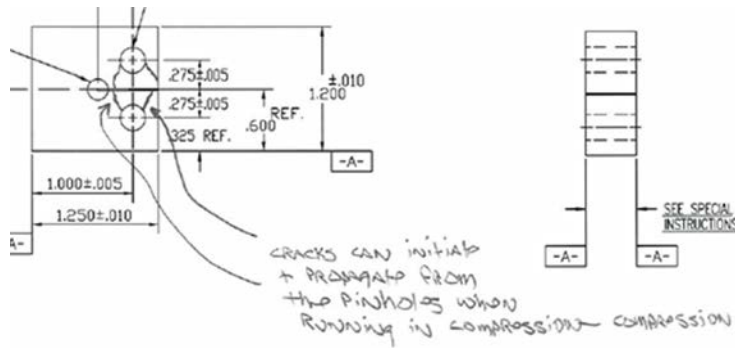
Unwanted cracks in C(T) specimen subjected to compressive pre-cracking
